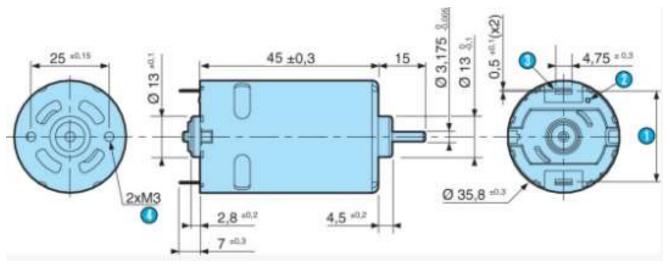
Motor Dimensions (Alibaba ,2013)
